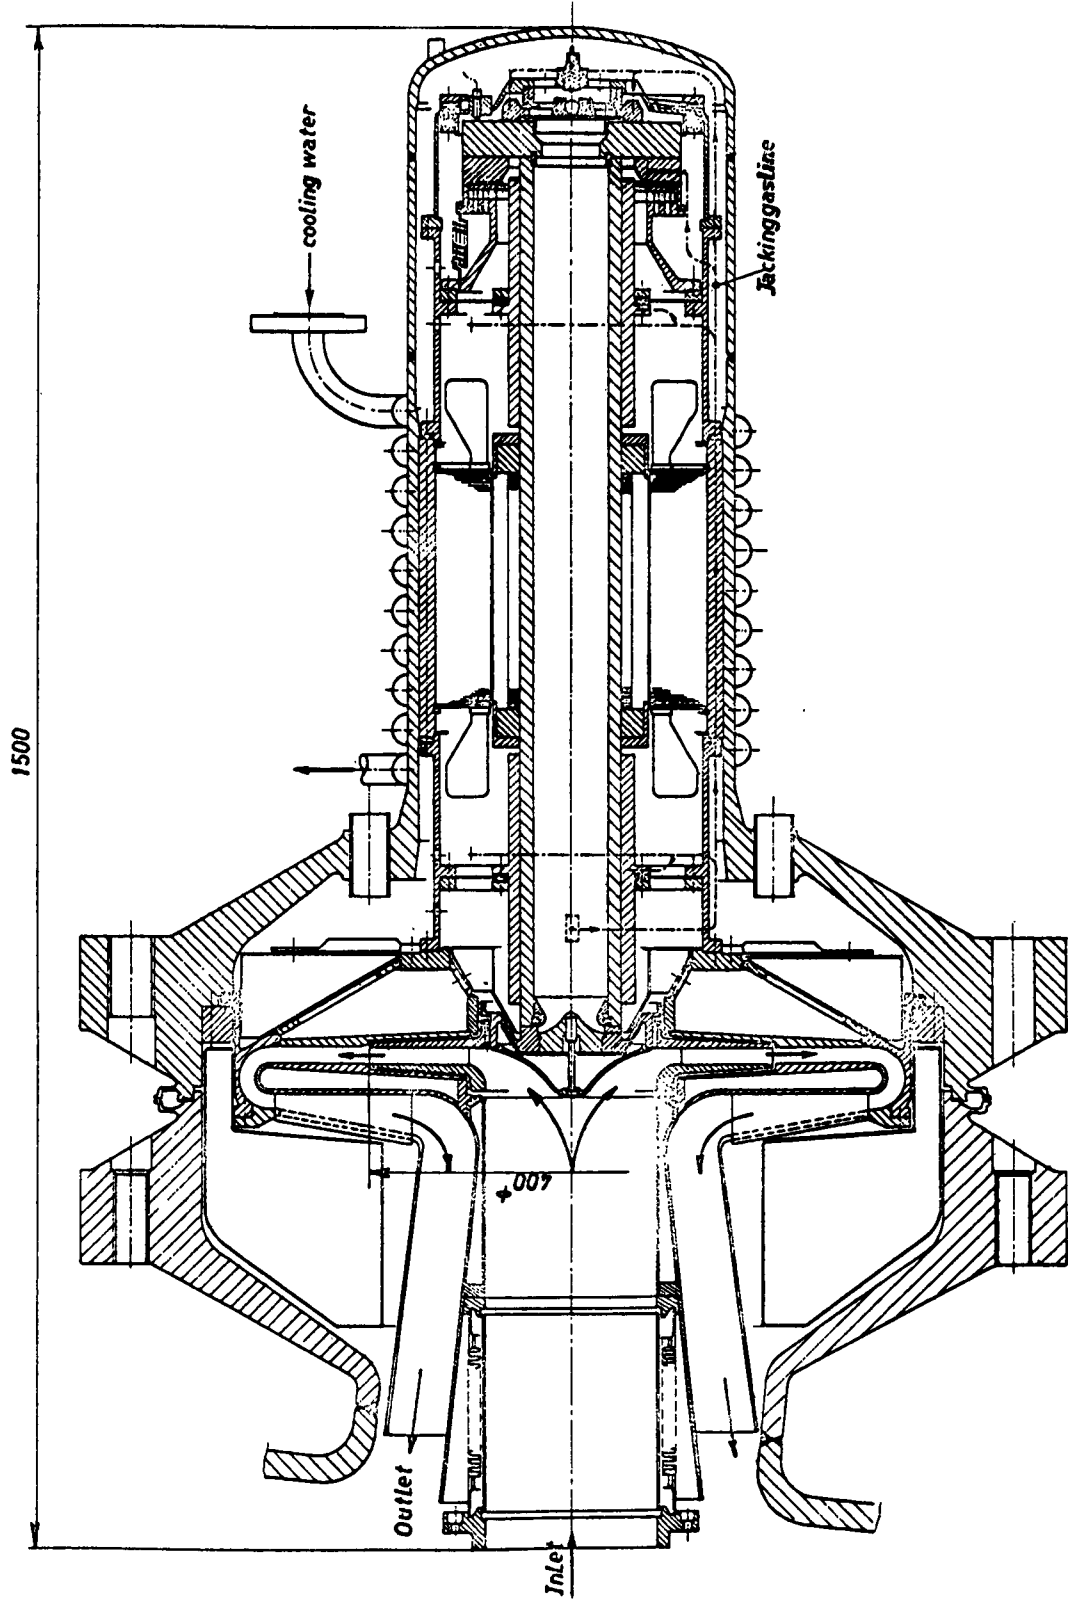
Centrifugal, Brown Boveri-Built Gas-Bearing Supported Compressor
